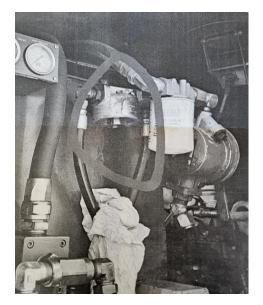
RT7 Hydraulic Filter Mounting Housing, Original Configuration. Failed Filter Removed
